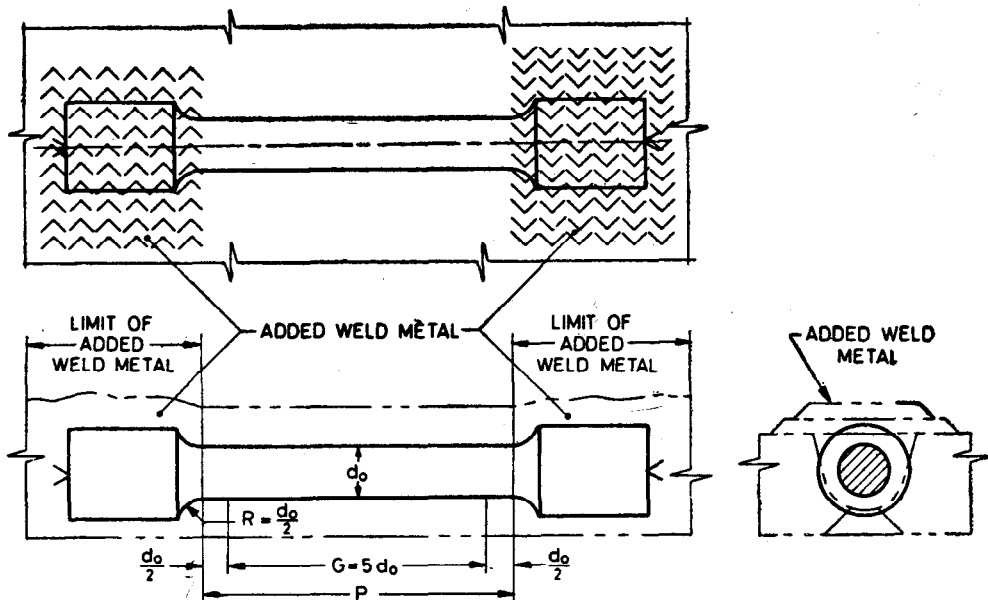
FULL SECTION TENSILE TEST SPECIMEN — SMALL PIPE
